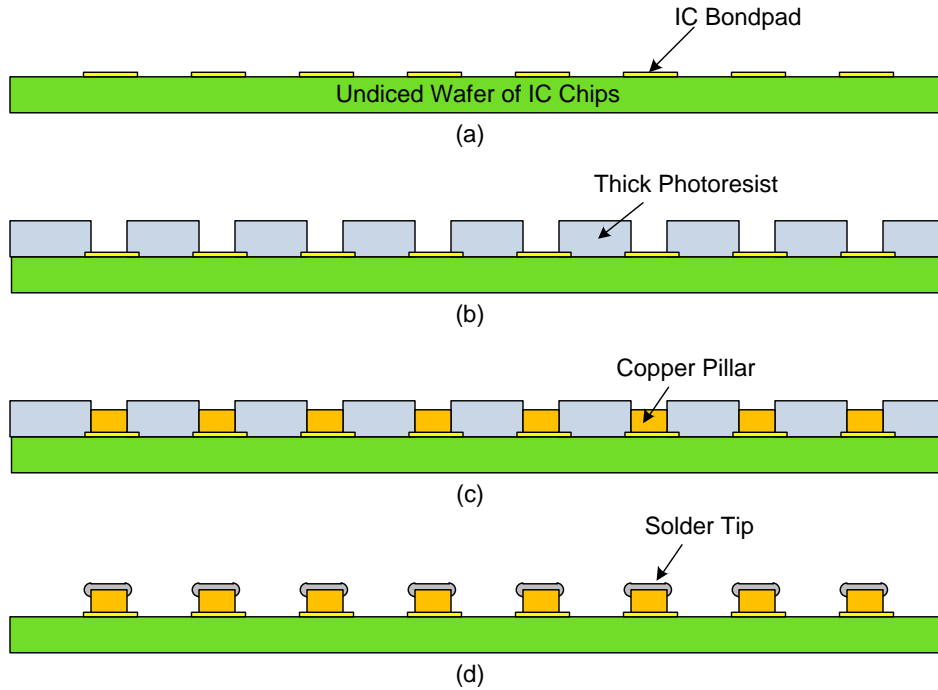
Cross section of a copper pillar fabrication process. (a) Starting with a wafer with bond pads prepped for copper plating, (b) deposit and pattern thick photoresist on the surface of the wafer. (c) Plate copper on the surface of the wafer and (d) remove the thick photoresist and tip the copper bumps with solder.
